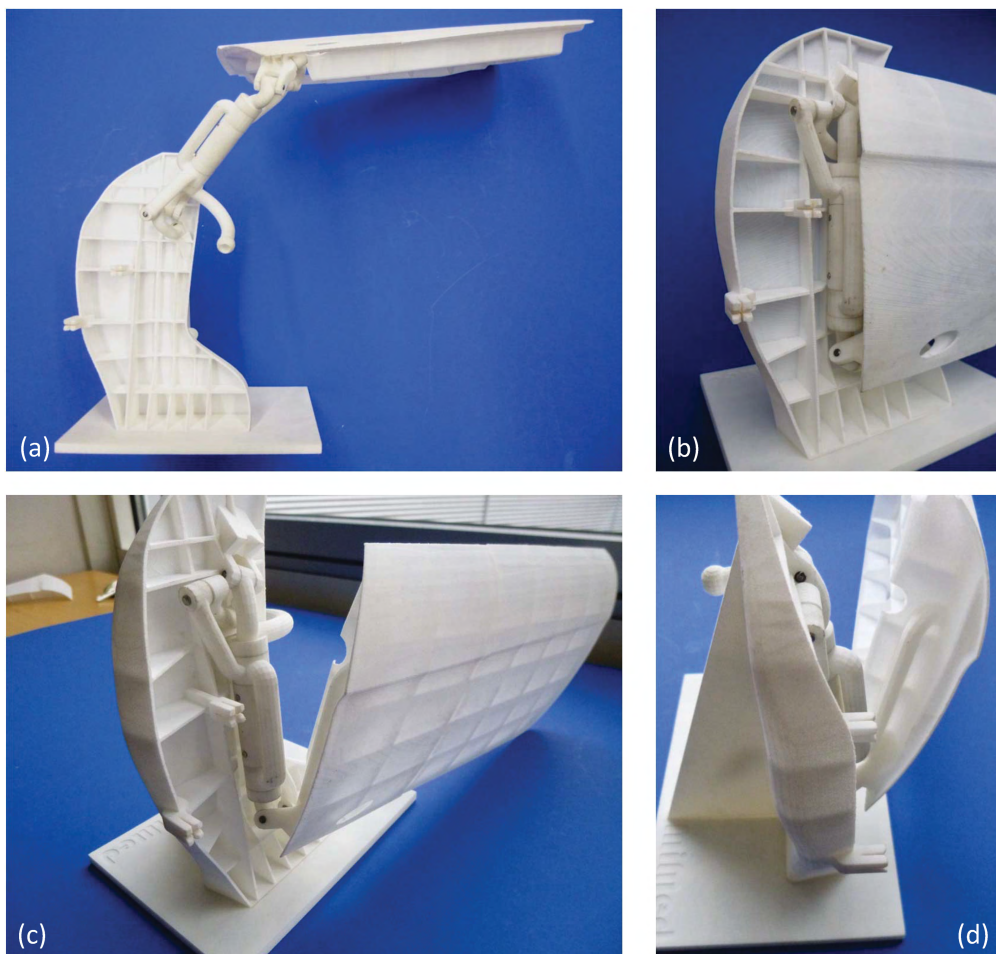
Scaled function prototype manufactured using selective laser sintering technique
